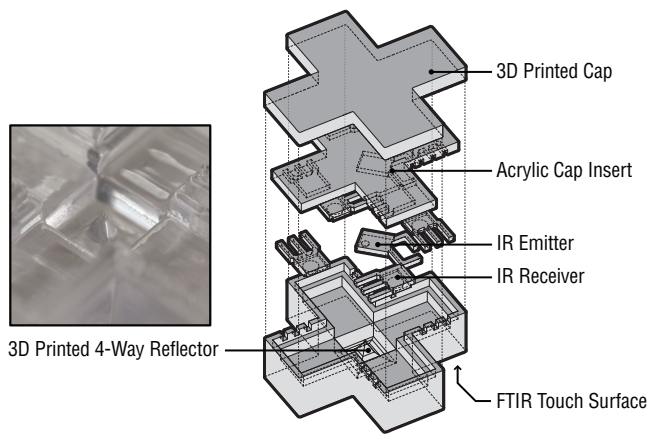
Exploded view of a D-pad made with embedded optoelectronic components. A 3D printed 4-way reflector is used to direct light into a custom shaped FTIR touch surface.
